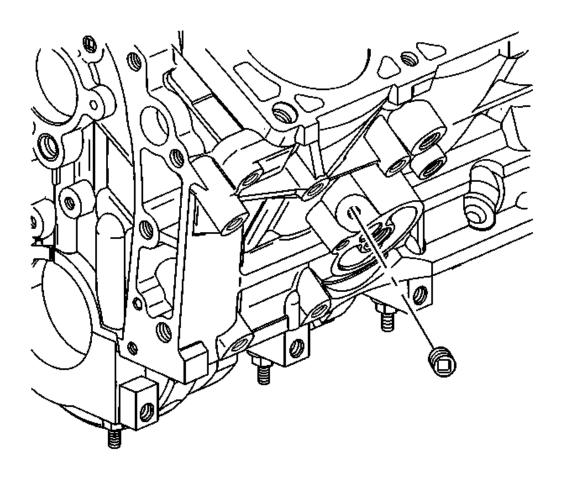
Proper Oil Filter Bypass Valve Depth Courtesy of GENERAL MOTORS CORP.
